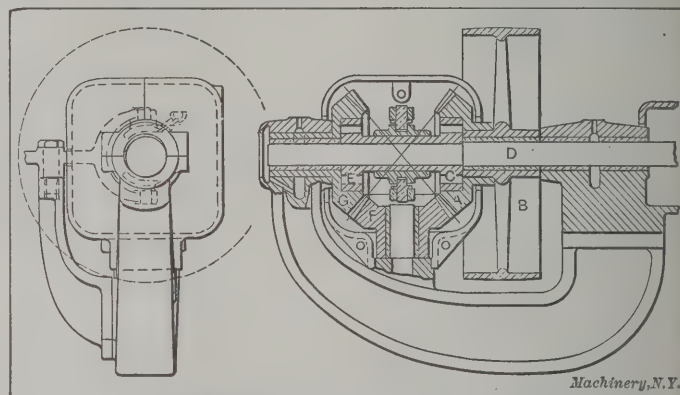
Arrangement of Gearing and Clutches for Reversing
